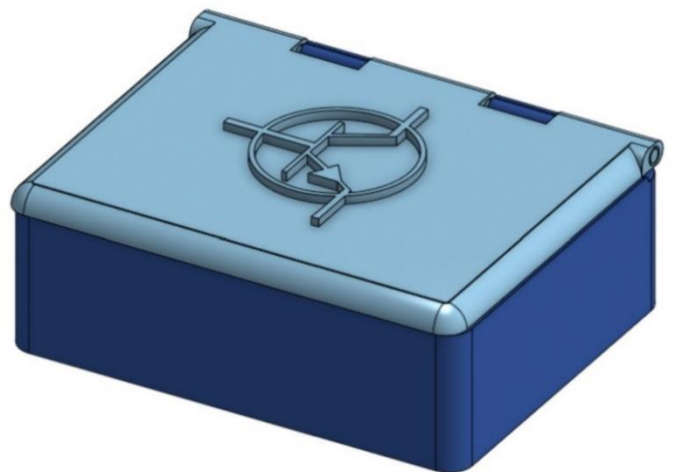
CAD model assembly of housing for Tri- Oscillator PCB
